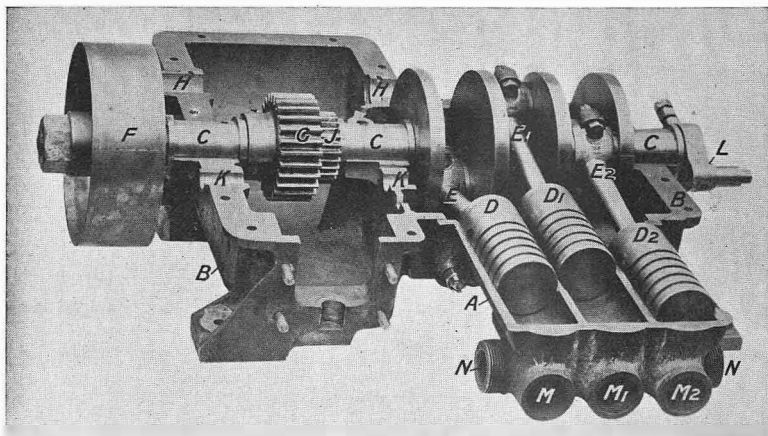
The Miesse steam motor, crankshaft, and pistons in position.
